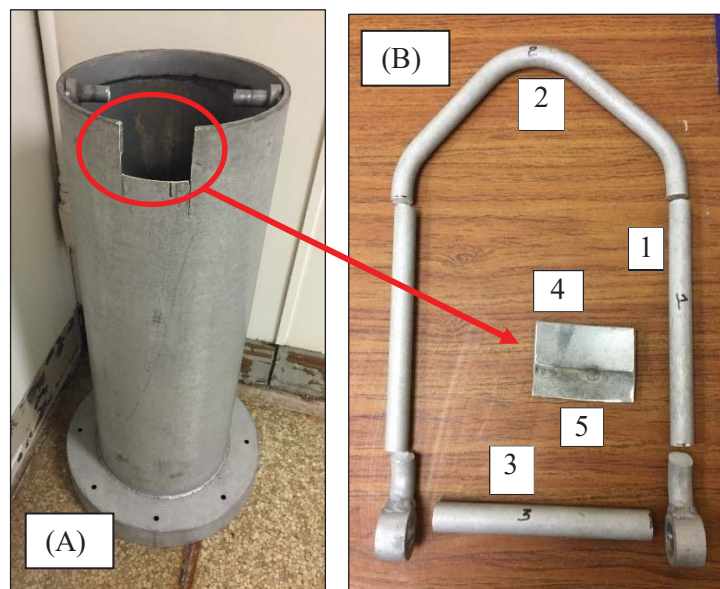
HFIR fuel outer carrier (A) and coupon cuts (B)
